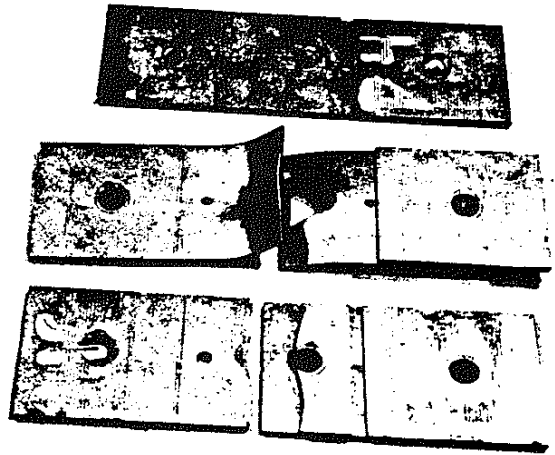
Photograph of Untested and Fatigue Tested B60XK G-90 (HSLA) Spot Weld Specimens. Top Untested Specimen, Middle Pull-Out Failure and Bottom Separation Failure.
